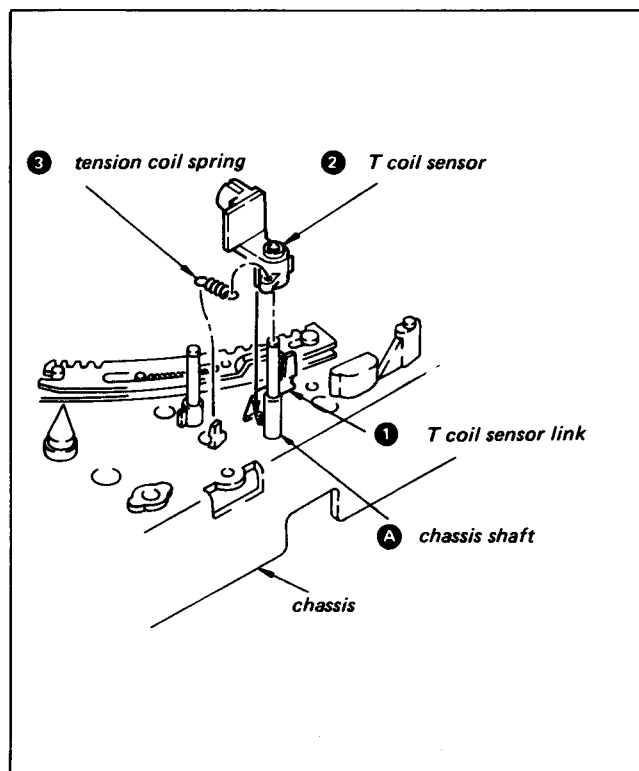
T coil sensor link and T coil sensor mounting.
